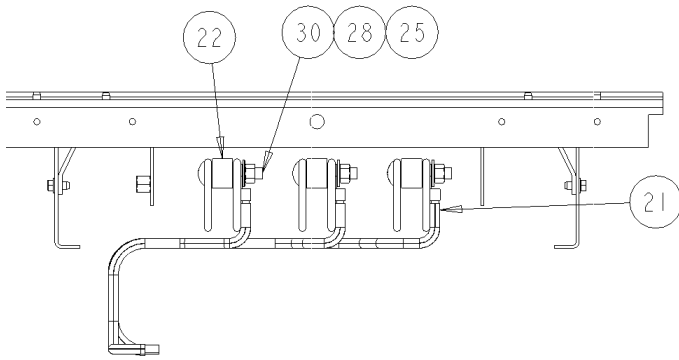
Plug-in assemblies without .281-inch square holes. (Interior spools are not shown for clarity)
